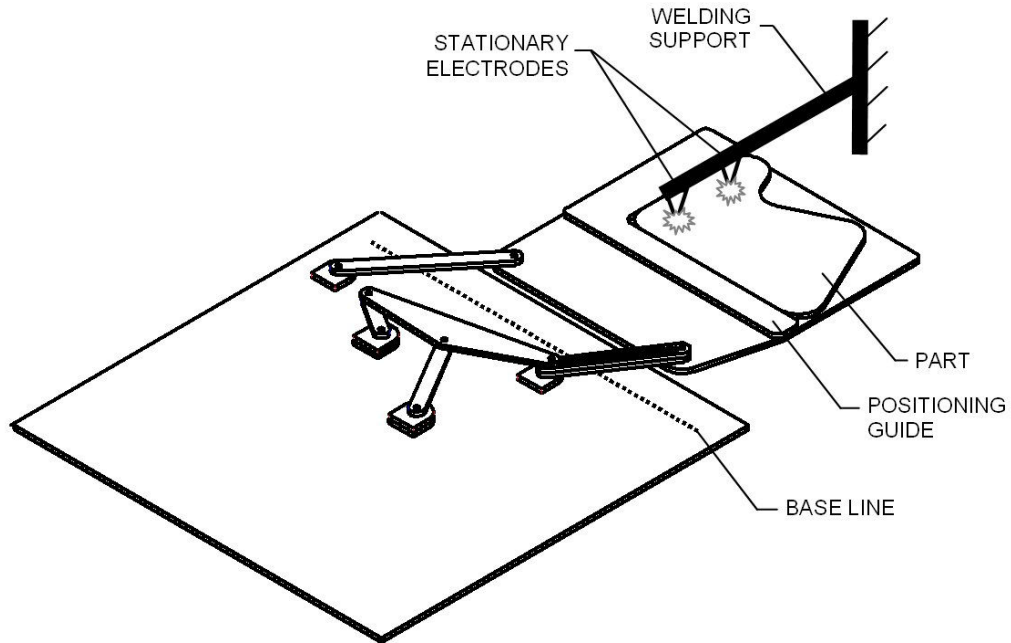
Complete linkage design example – part is in the first welding position
